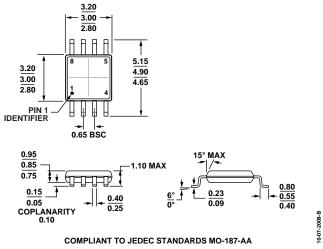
8-Lead Mini Small Outline Package [MSOP] (RM-8)
